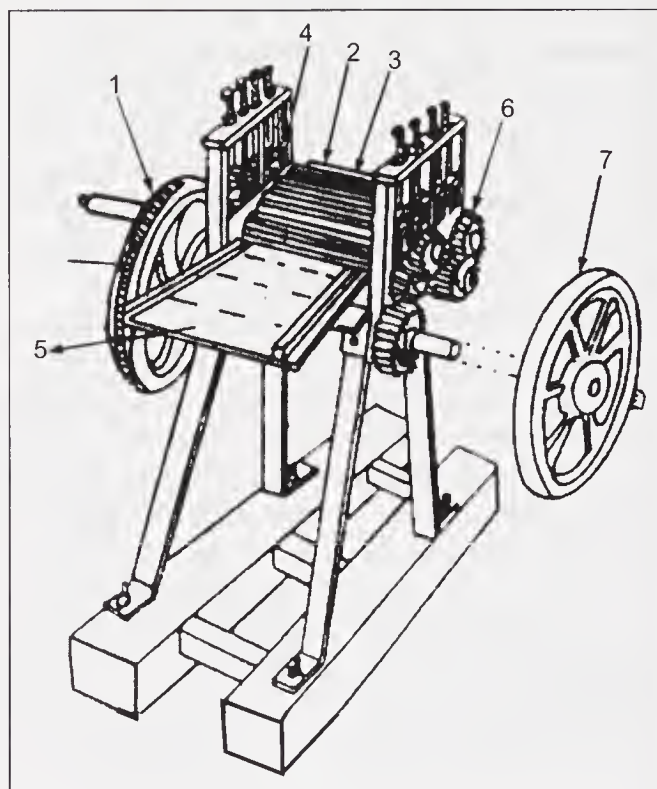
Flax-scutching machine manually operated. (1), Handle; (2), fluted rollers; (3), pressure springs; (4), gears; (5), feeding tray; (6), gear for conveyor; and (7) second flywheel.
